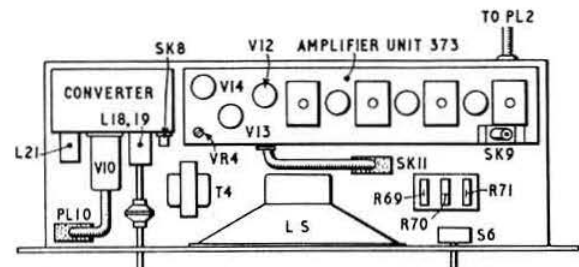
The receiver chassis is of similar dimensions to that for the transmitter but is only 1 in. deep.
